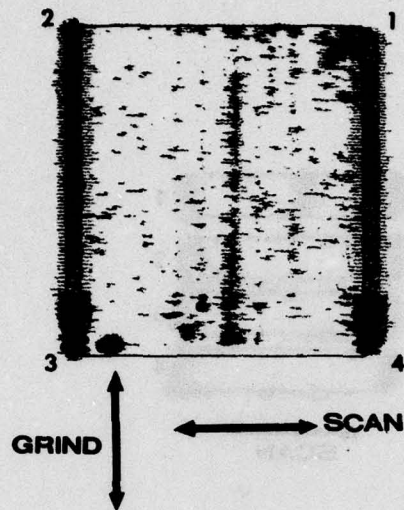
C-scan Recording of 45 MHz, 18° Surface Wave Inspection of Bottom Surface of Billet of Boron Doped SSiC (Scan Perpendicular to Grinding Direction).
